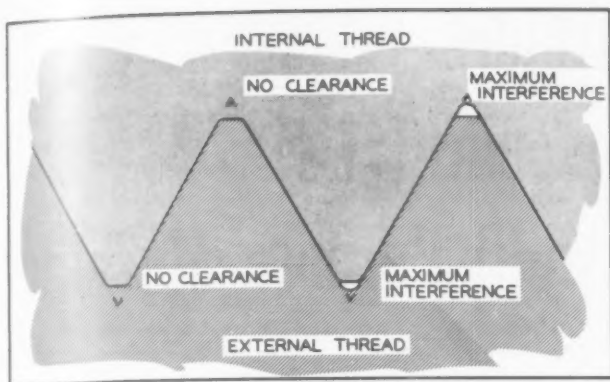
The American Standard Dryseal Taper Pipe Thread (NPTF). When threaded joints are made up wrench-tight without lubricant or sealer, it is intended that the flanks and the crests and roots shall be in contact.
